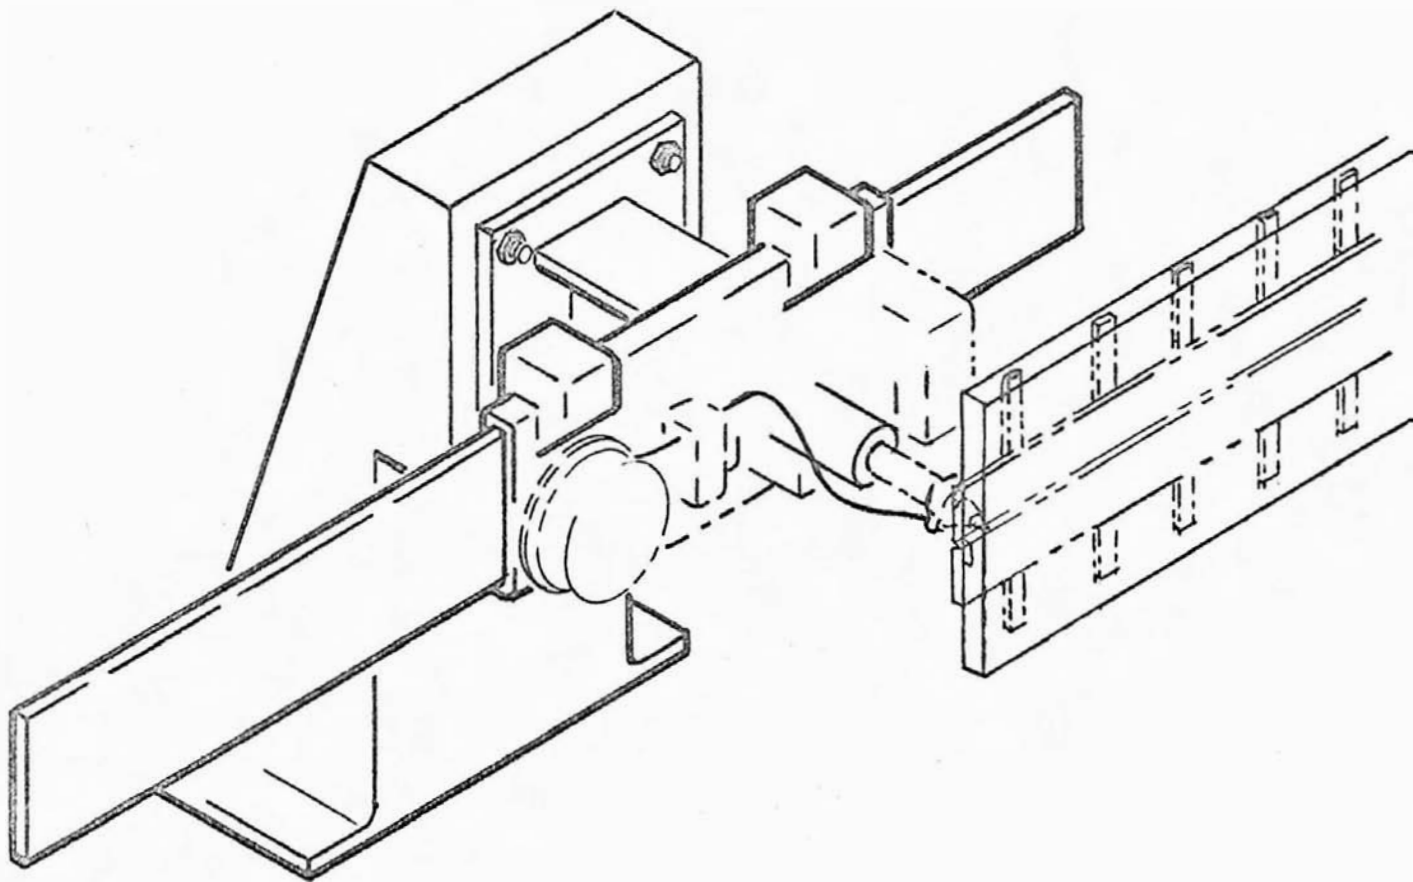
Welding Equipment Acceptance Test Weld
